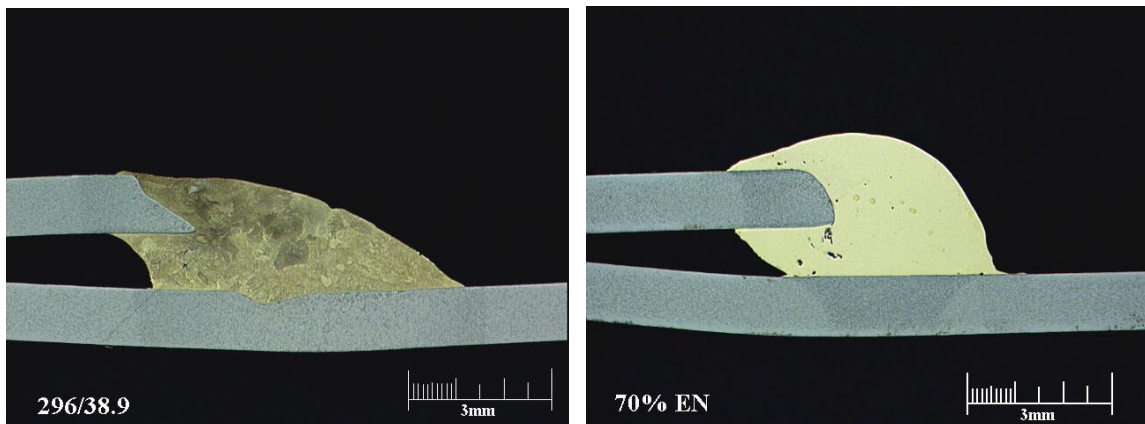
and 1b – GMAW-Pulse braze weld where high heat input caused melting of top and bottom plates, and high levels of zinc diluted into the weld metal (left). Variable Polarity GMA braze weld with almost no melting of the base material, and very little zinc dilution (right).
